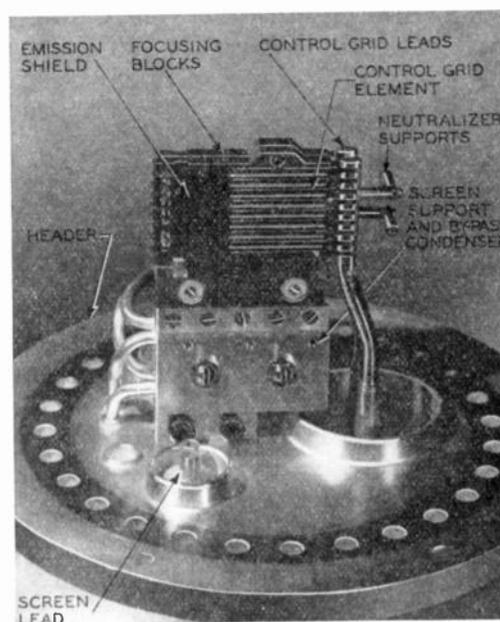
The header with filament, filament shields, No. 2 mounting blocks, and No. 1 grids mounted.
